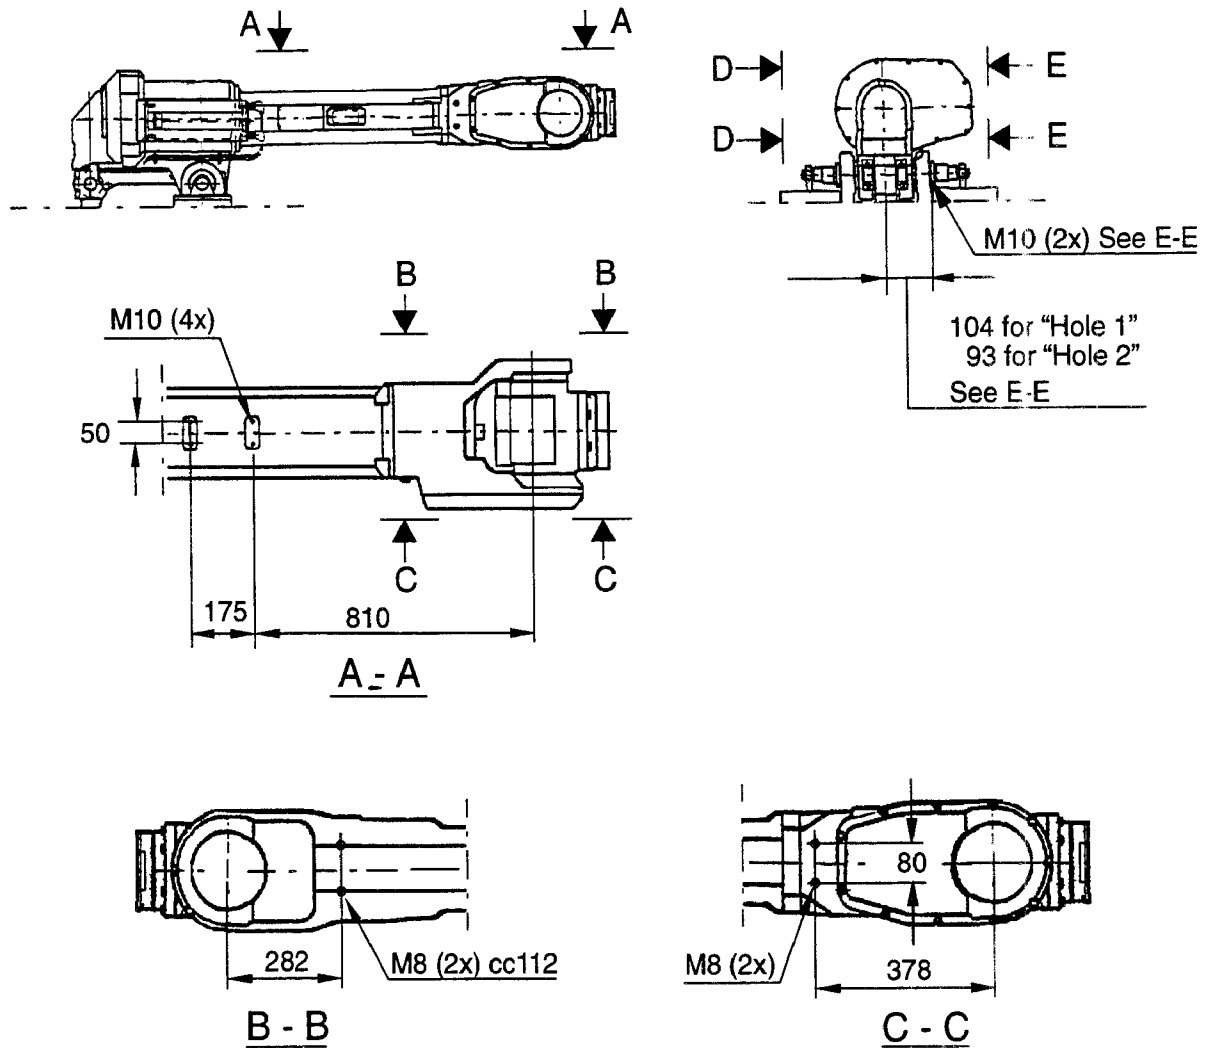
Holes for mounting of extra equipment (Measures in mm).
